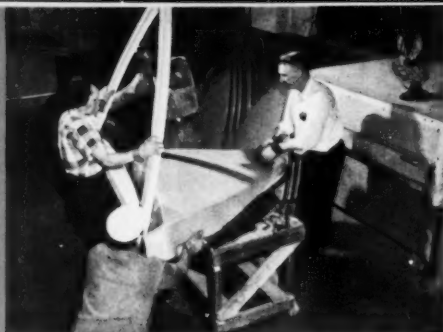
After sheet has been pulled over form, it is held until cool by the clamping device, Fig. 1
